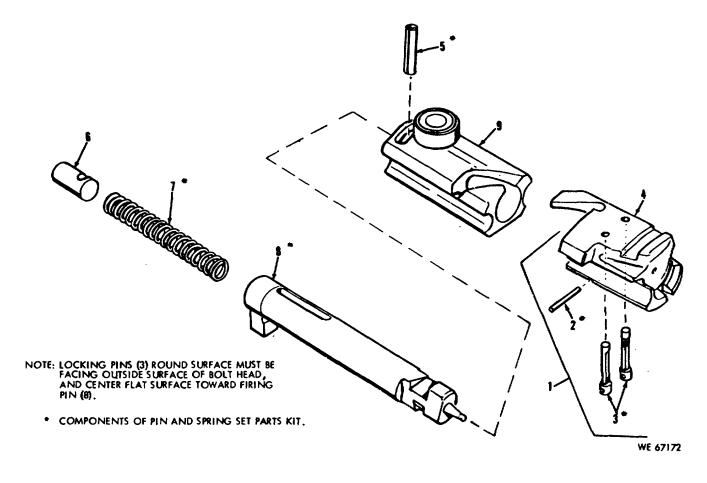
(Superseded) Bolt Assembly-exploded view.
